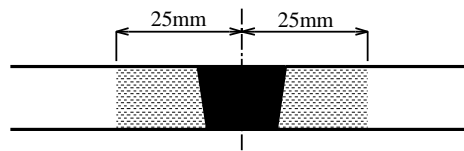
Heat-Affected Range Due to Friction Stir Welding
